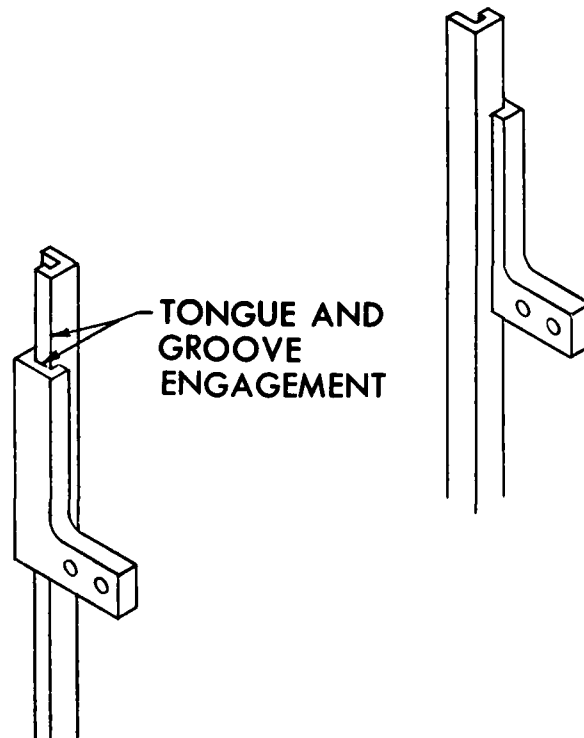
L-shaped Brackets Slide on End Rails of Central Pedestal.
